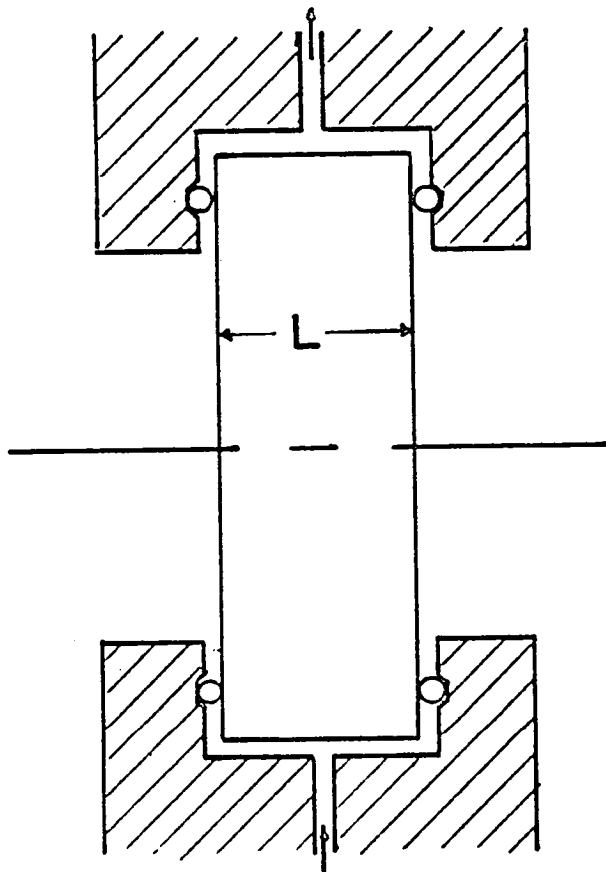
Port Inlet/Outlet With O-Ring End Seals Used in Shear
